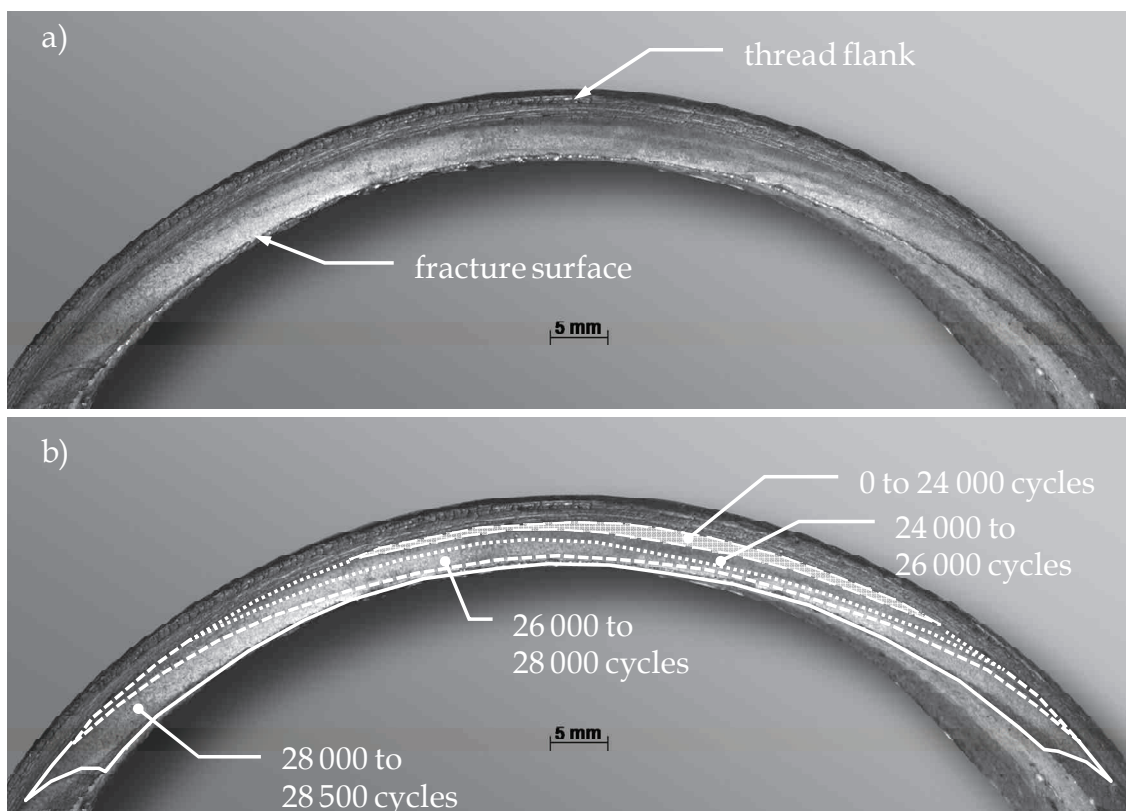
a) Fracture surface of test 4; b) zones divided by the beach marks.
